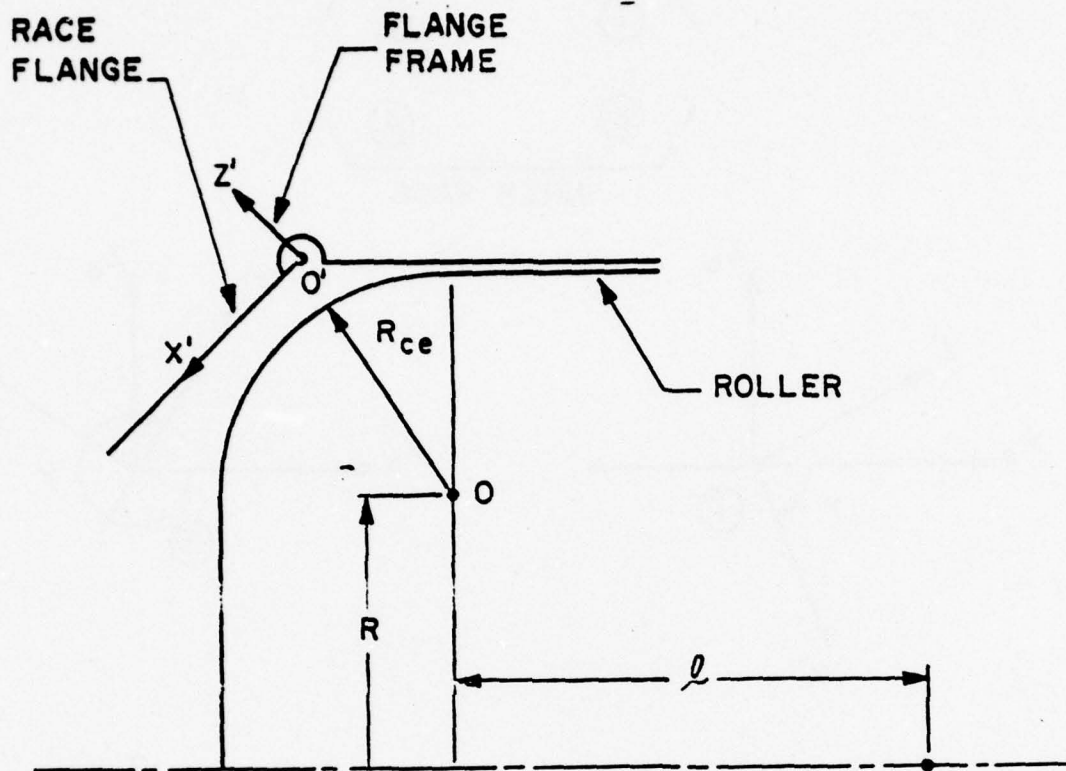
Exaggerated View of Roller Corner and Race Flange Interaction
